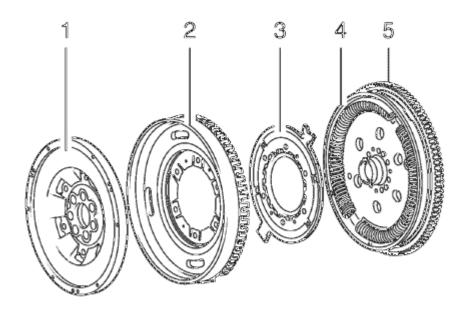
Exploded View Dual Mass Flywheel with Additional Mass Courtesy of GENERAL MOTORS COMPANY
